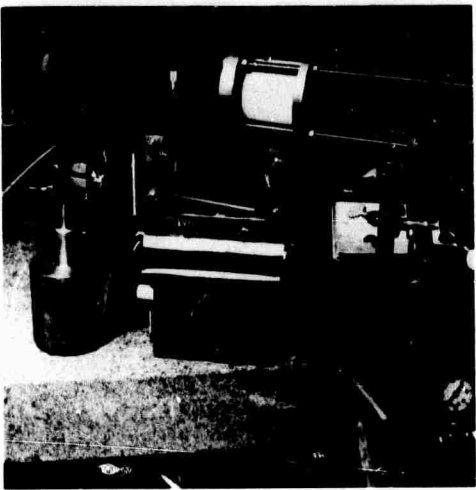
EXPERIMENTAL SETUP FOR DETECTING DEFECTS IN ARTILLERY SHELL CASING
